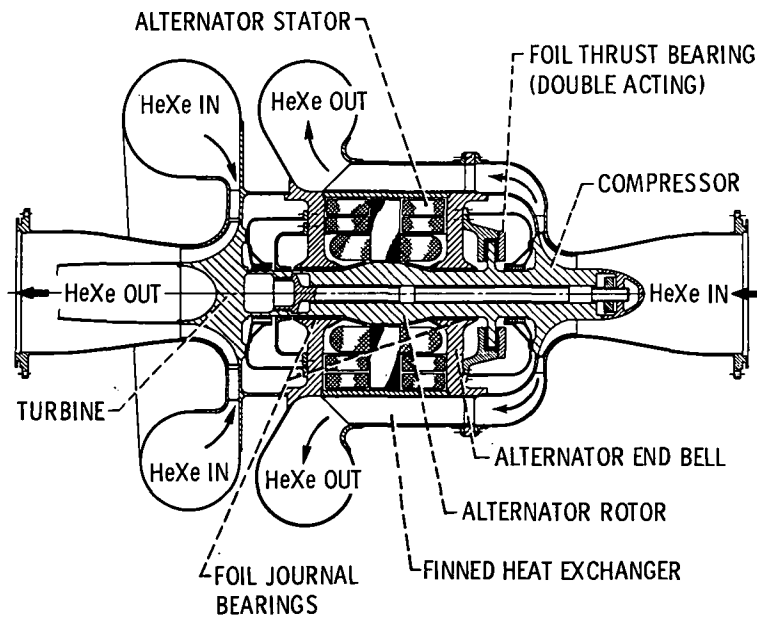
Brayton Rotating unit cooled with compressor discharge gas.
